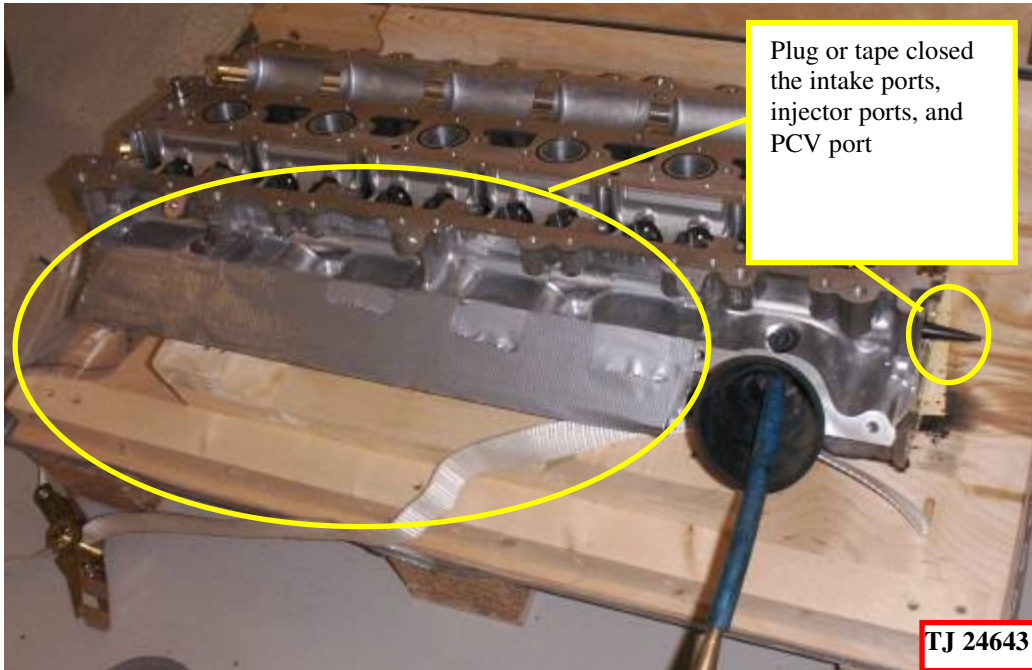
Note that the cylinder head is removed in this photo but this test should be performed on the vehicle.
